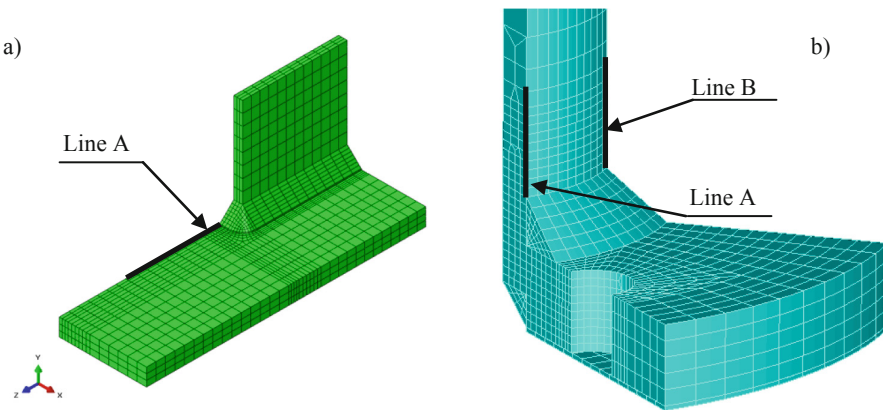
FEM mesh for structural stress prediction; (a) longitudinal welded attachment LA120, (b) bolted flange joints BK 20.4.2 (the bolt is not shown)
